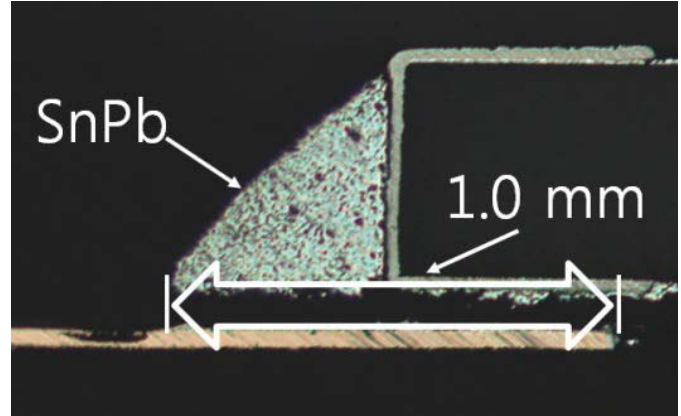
Representative fatigue failure of solder joints in 6332-type solder joint assembly.
